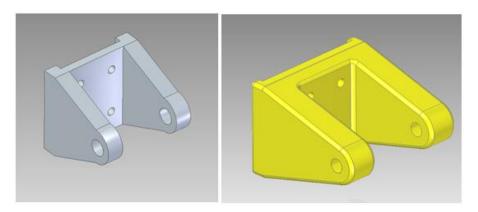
Left, old upper bracket joint. Right, new bracket joint.
